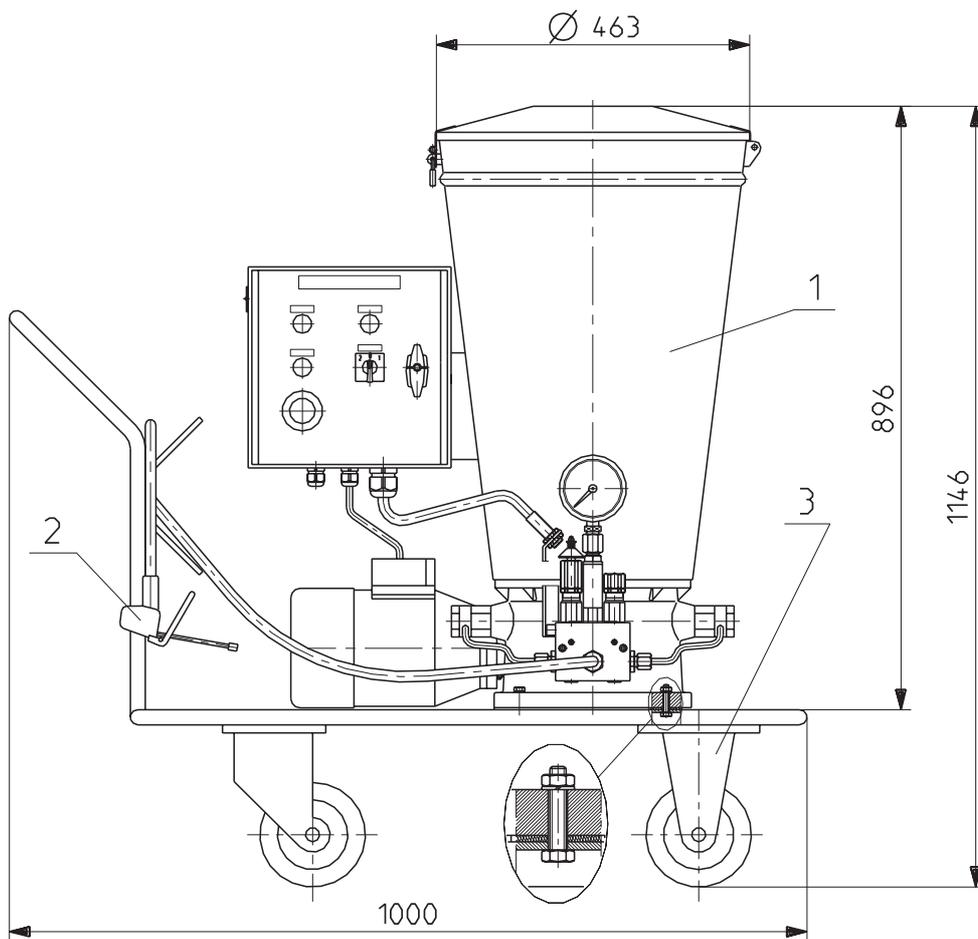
Overall dimensions of the lubrication stand SA 1G
